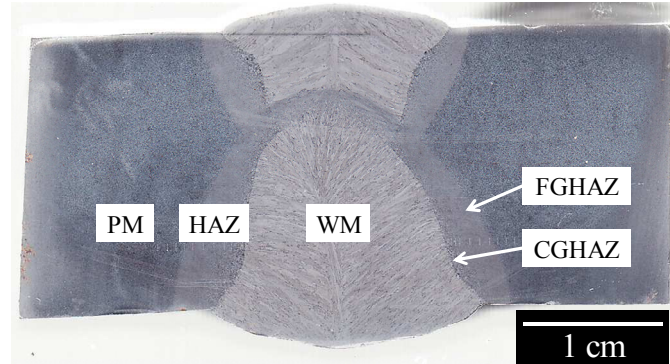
Typical weld zones of SAW welded A709 Grade 50 steel.
